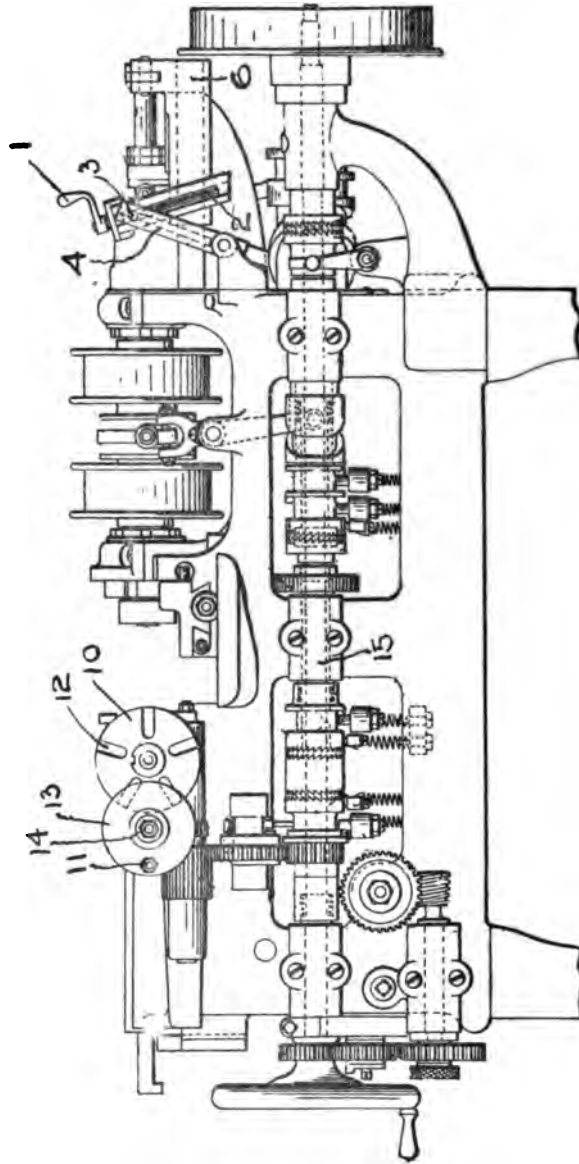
AUTOMATIC SCREW MACHINE SHOWING FEEDING AND INDEXING DEVICES,
